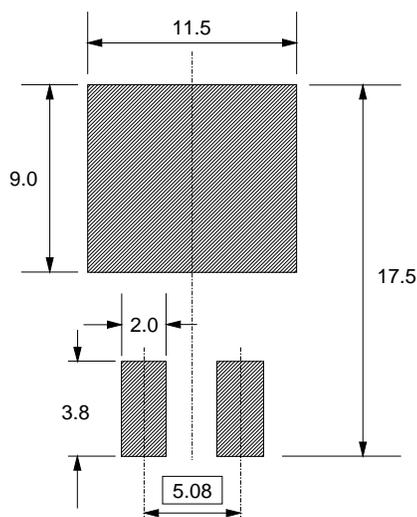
SOT404 : minimum pad sizes for surface mounting.
